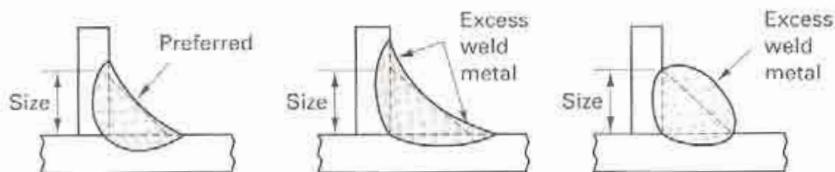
Preferred shape and the method of measuring the size of fillet welds.
